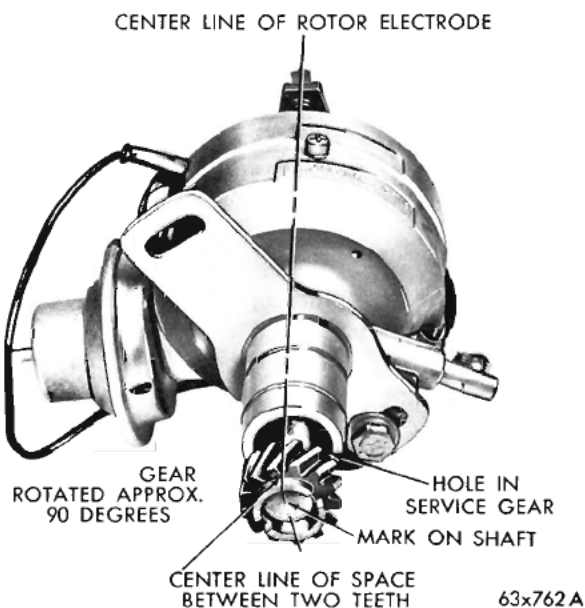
Aligning Gear Teeth with Centerline of Rotor Electrode
